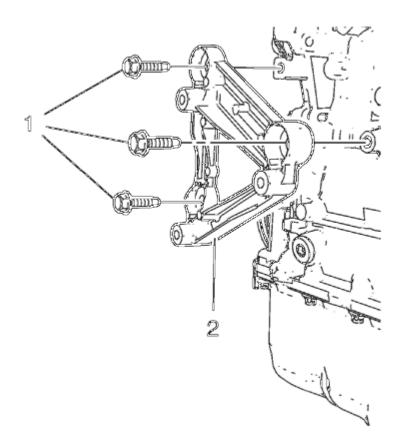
Drive Belt Tensioner And Bolts Courtesy of GENERAL MOTORS COMPANY
